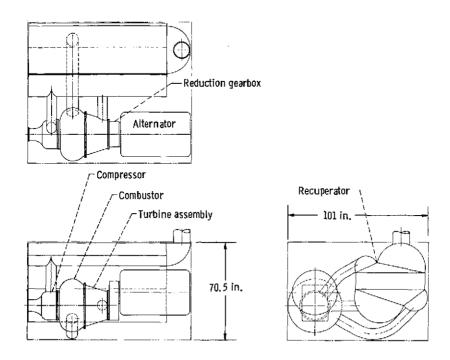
, - Group V (open cycle) 7500-horsepower, single-shaft TACV component layout,
